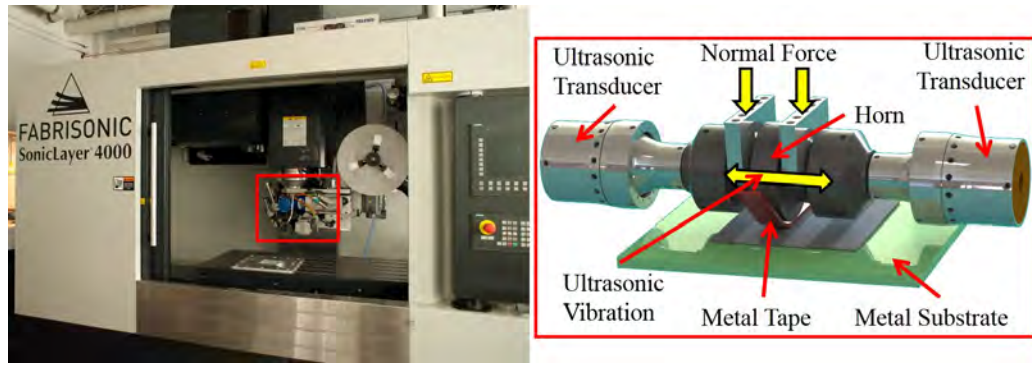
Very high power UAM machine installed in the Center for Ultrasonic Additive Manufacturing at The Ohio State University, and schematic of the ultrasonic system (motion during welding shown by arrows).
